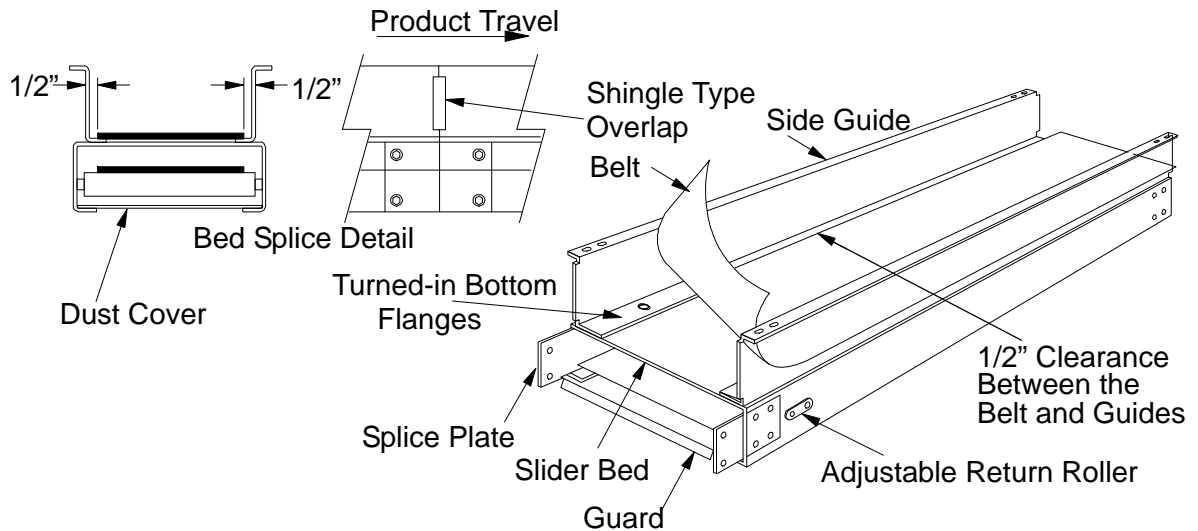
Slider Bed Section, Side Guides, and Underside Guard/Dust Cover
